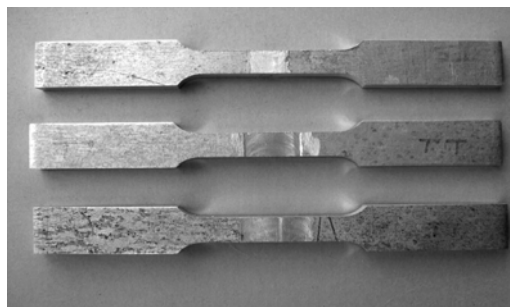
Photograph of typical tensile specimens fabricated with three different diameter pinned tool
